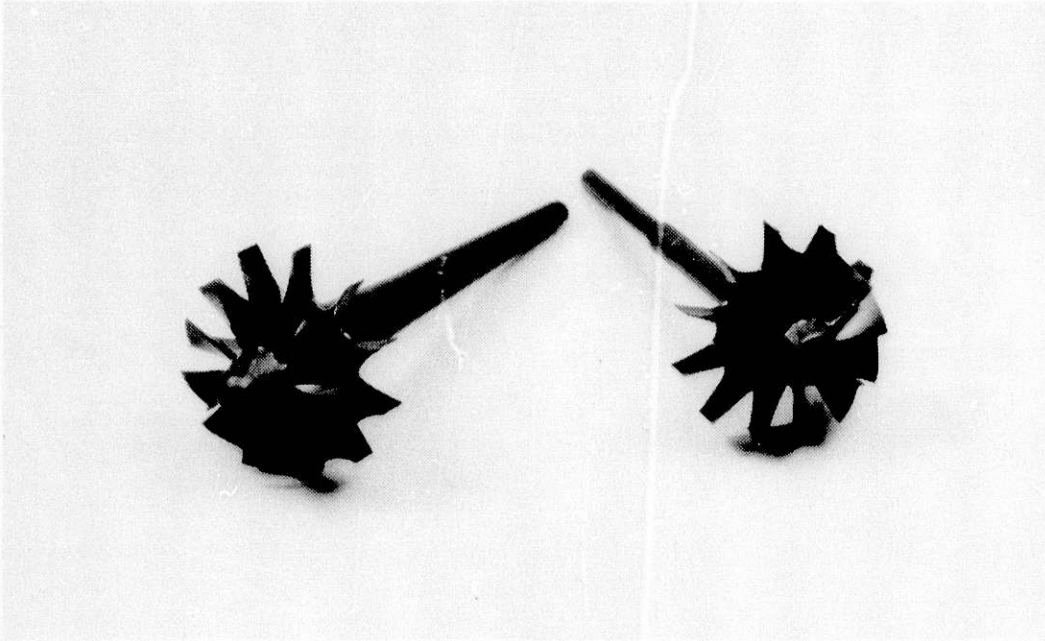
Prototype silicon carbide turbocharger rotor made as a single part by powder technology. (Photograph courtesy of Carborundum Co., Niagara Falls, NY).
